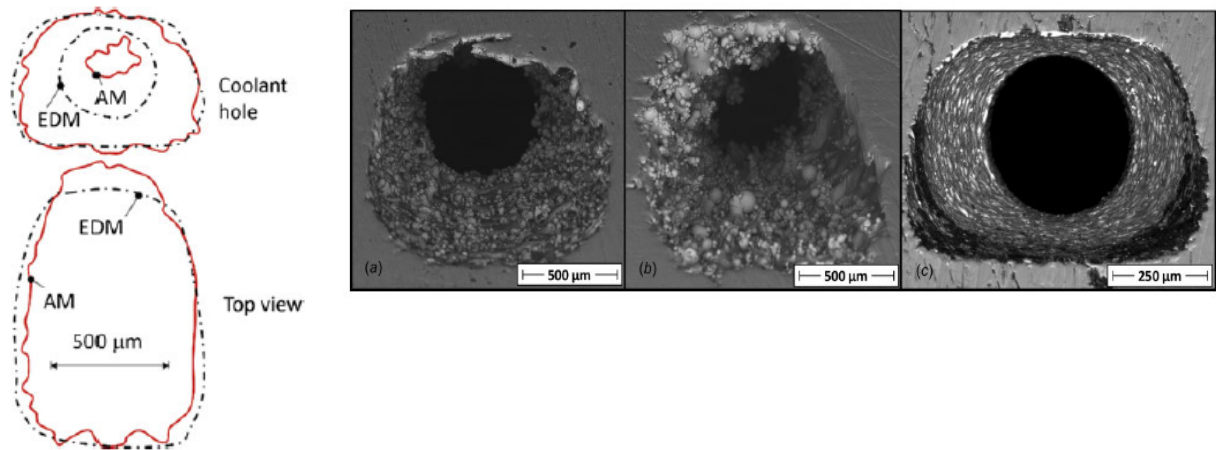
(a) AM cooling hole, vertical (b) AM cooling hole, horizontal (c) EDM cooling hole [29]
